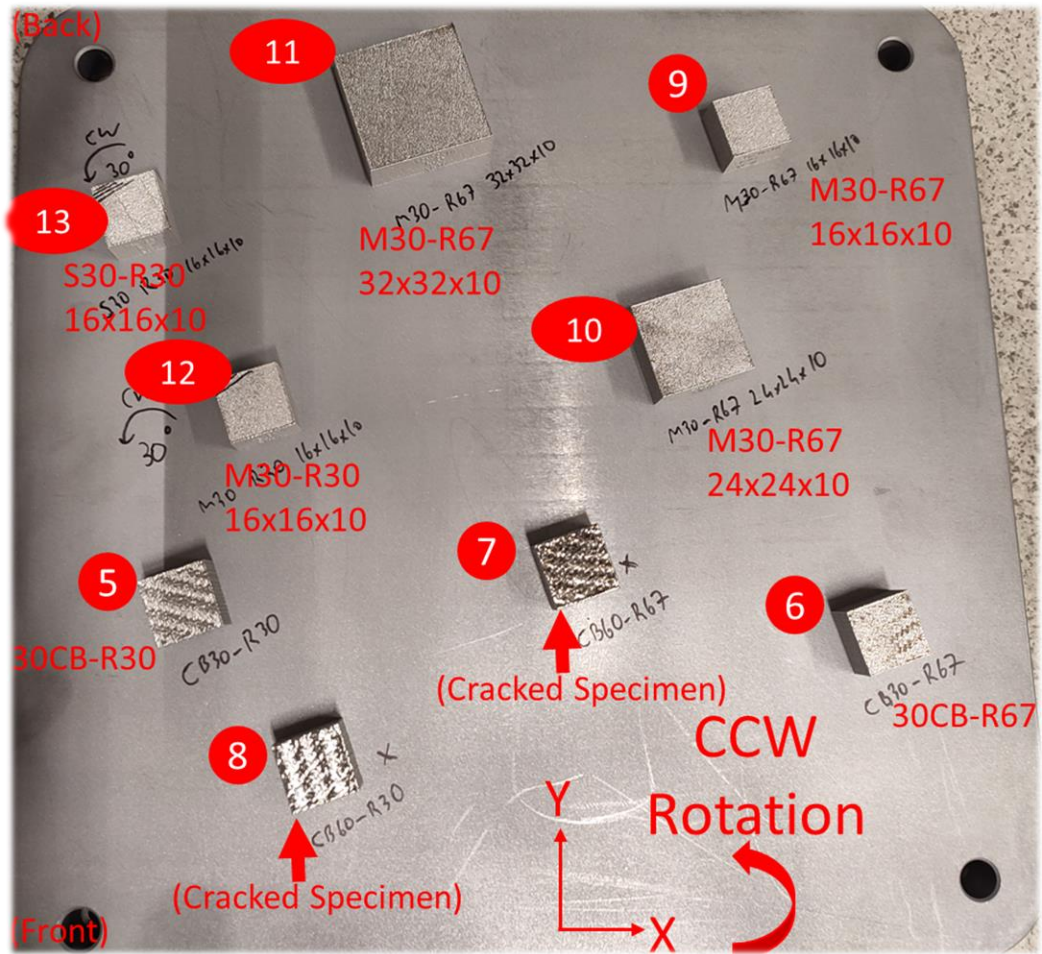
30-CB Rotation 30° (specimen#5), 30-CB Rotation 67° (specimen#6), 60-CB Rotation 67° (specimen#7), 60-CB Rotation 30° (specimen#8), 30-M 16mmx16mmx10mm Rotation 67° (specimen#9), 30-M 24mmx24mmx10mm Rotation 67° (specimen#10), 30-M 32mmx32mmx10mm Rotation 67° (specimen#11), 30-M 16mmx16mmx10mm Rotation 30° (specimen#12), 30-S 16mmx16mmx10mm Rotation 30° (specimen#13)
